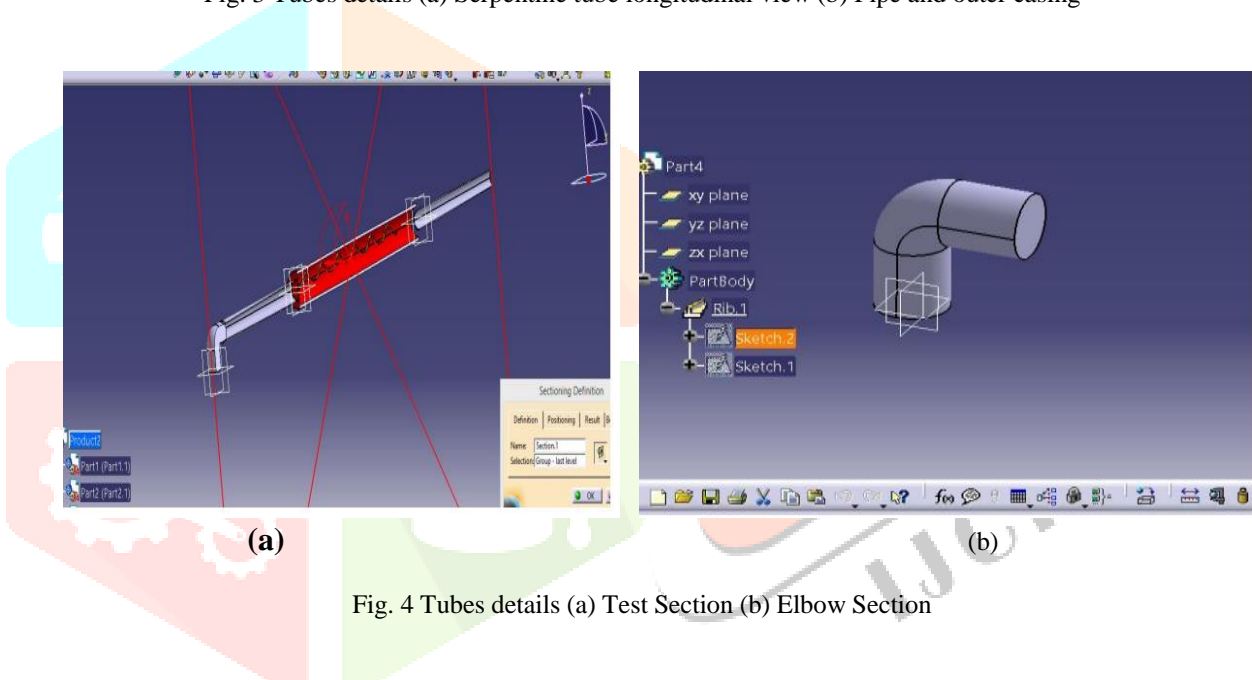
Tubes details (a) Test Section (b) Elbow Section
